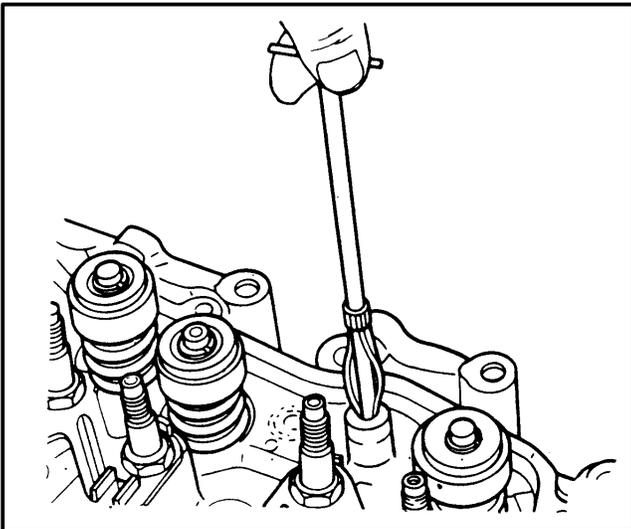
TOOL FOR CLEANING THE VALVE GUIDES
